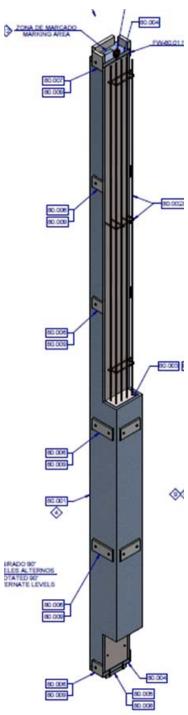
Diagram of dummy assembly used for rail-cask tests.
